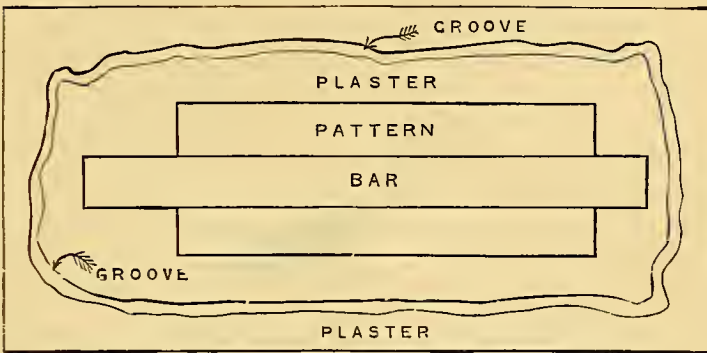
REVERSED VIEW OF MOULD WHEN PAPER IS REMOVED.
